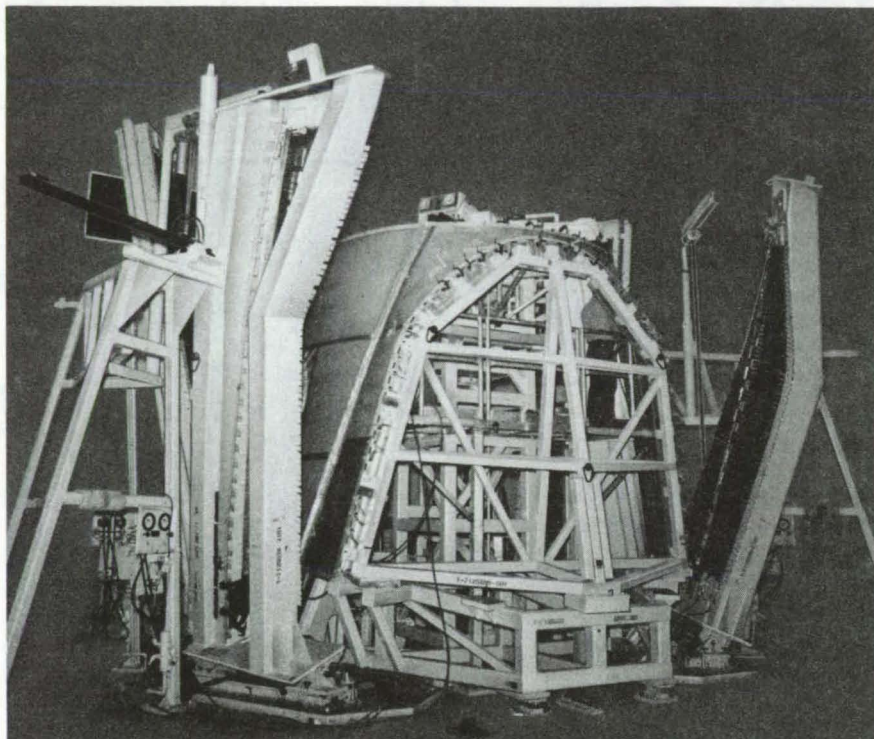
The Multiple Assembly Weld Tool, shown here with sizing plug installed, is one of the special jigs that hold the parts for accurate dimensional control. A universal skate system allows the parts to be routed, sawed, welded, and X-rayed without having to be moved.
